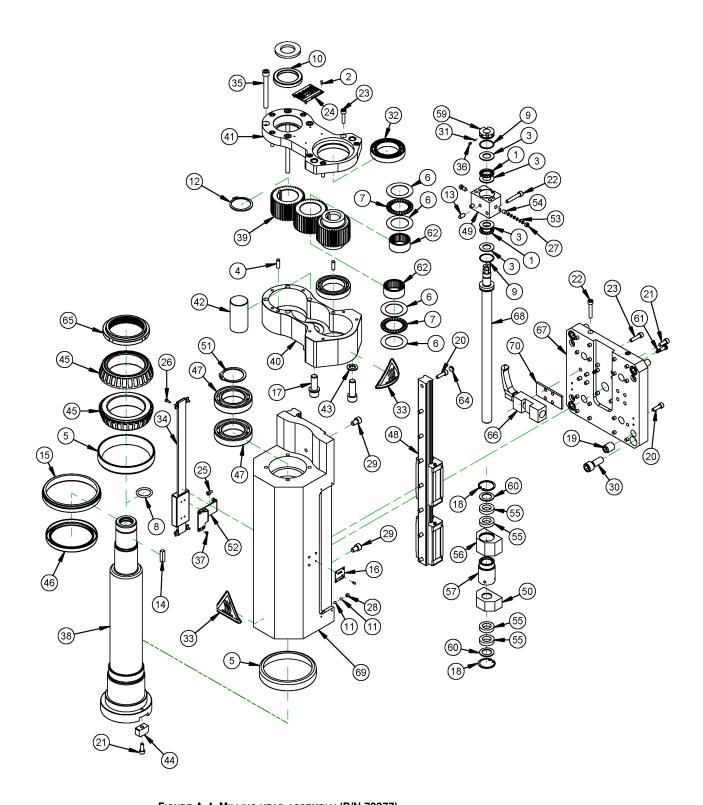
MILLING HEAD ASSEMBLY (P/N 72277)
